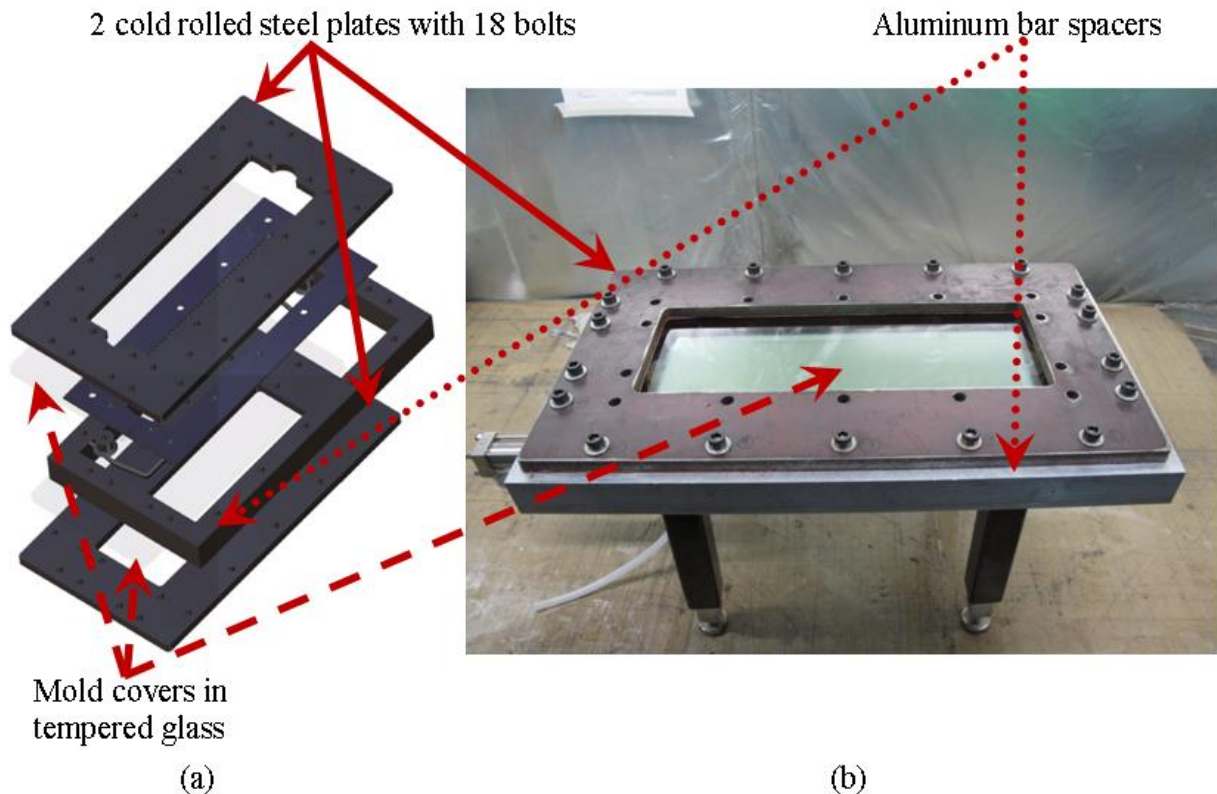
The RTM mold design: (a) CAD view of the RTM mold; (b) picture of the RTM mold with tempered glass covers and aluminum spacers bolted and sandwiched between steel plates.
